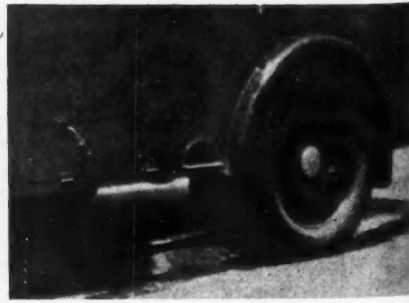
Step on a skirted refrigerator body supplied by cutting and welding
